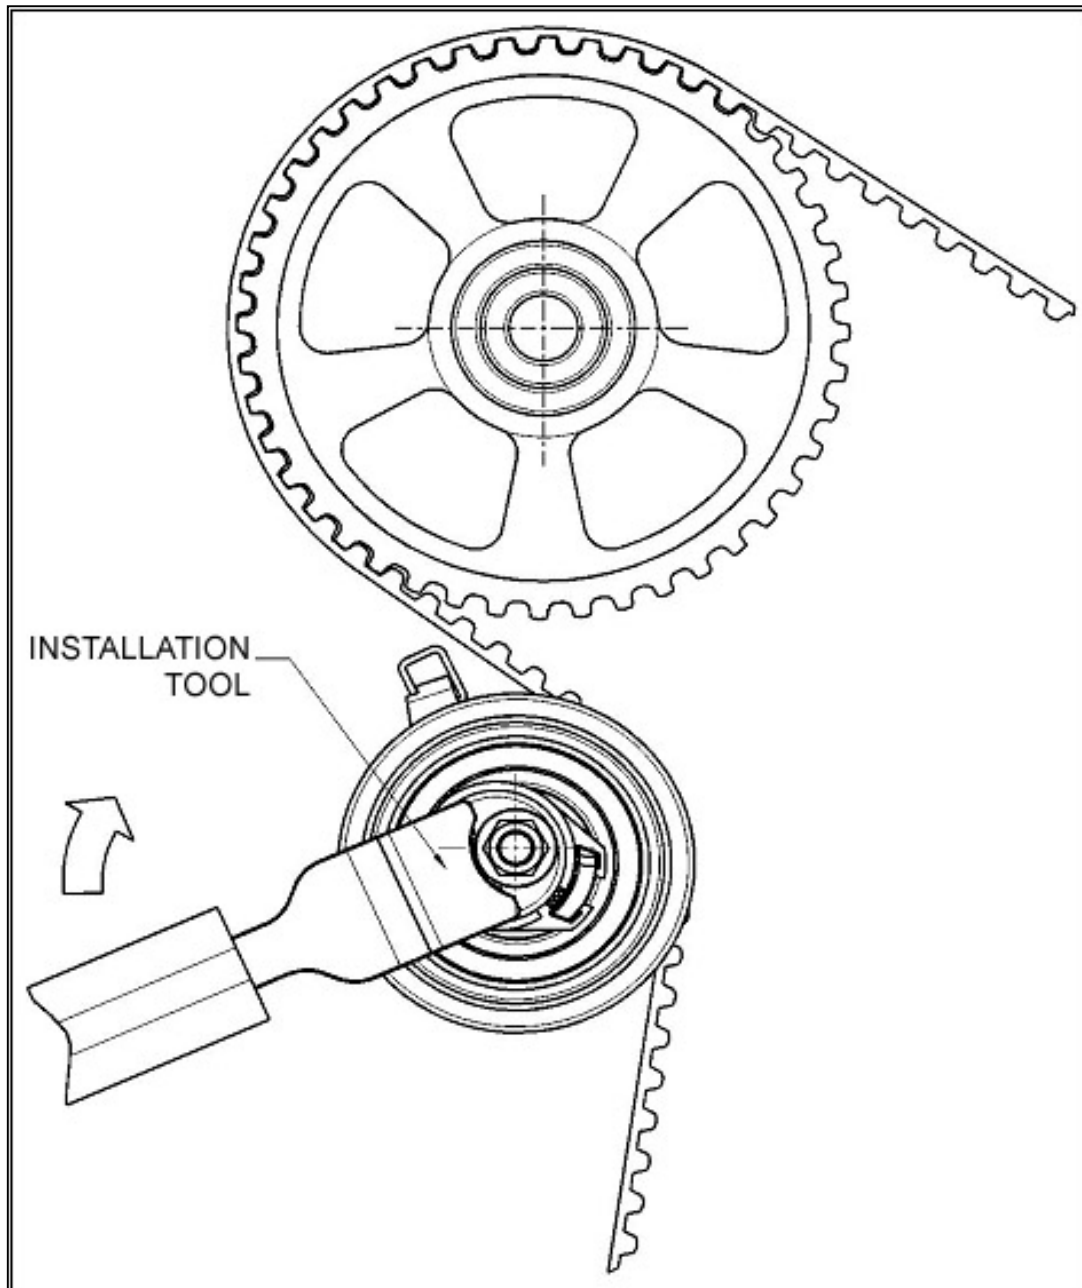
Hand-tighten the mounting nut. Fit the special installation tool on the installation shaft. Turn the installations shaft in clockwise direction.
